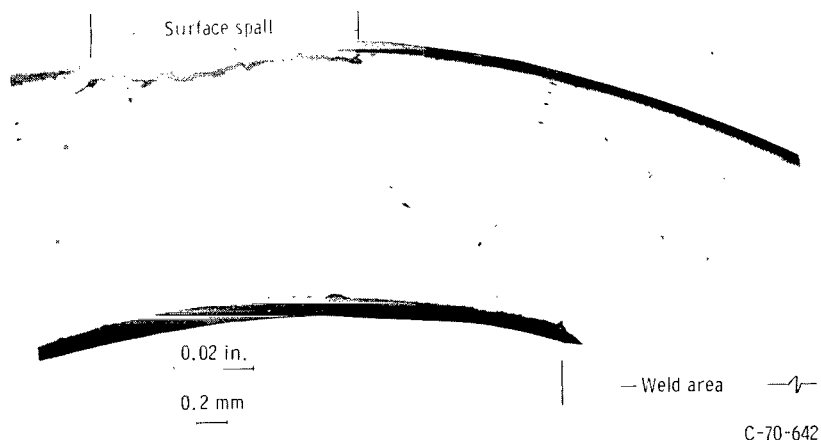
Typical section through junction of weld and running track showing crack connecting inside of wall with spall on outer surface. AISI M-50 steel 11/16-inch- (17.5-mm-) diameter hollow ball (upper test ball in five-ball fatigue tester). Maximum Hertz stress, 700 000 psi (4.82×10^9 N/m²); etchant, Picral-hydrochloric acid.
